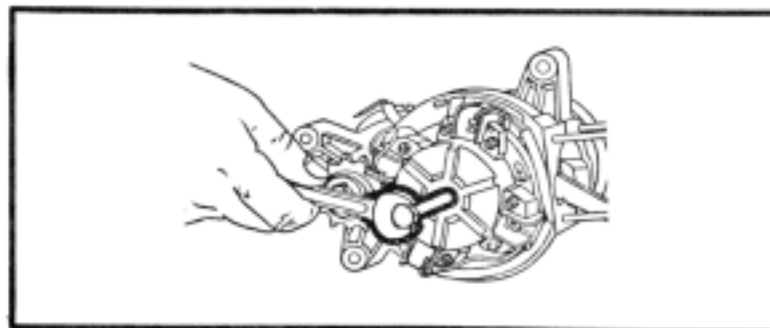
Tranzimo rotor is extracted with Jawa special tool No. 16 65672 4.3.
